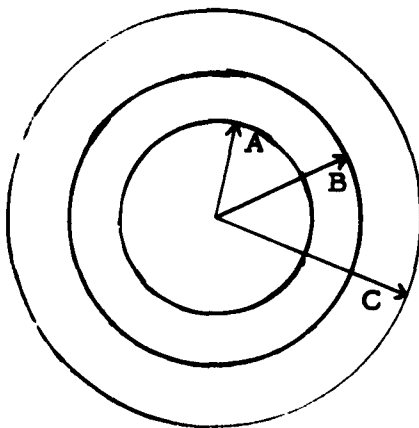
LINER AND FIRST SLEEVE ASSEMBLY
